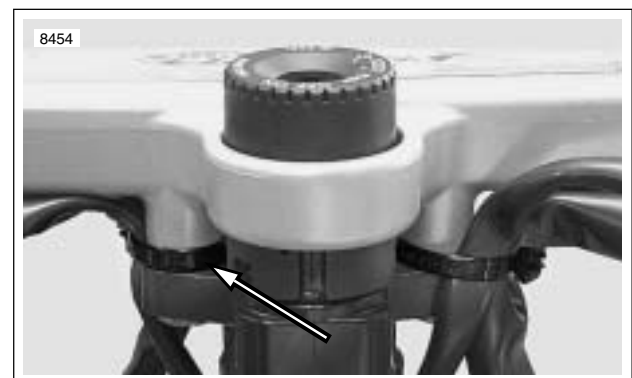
Cable Strap On Left Side of Upper Fork Clamp
